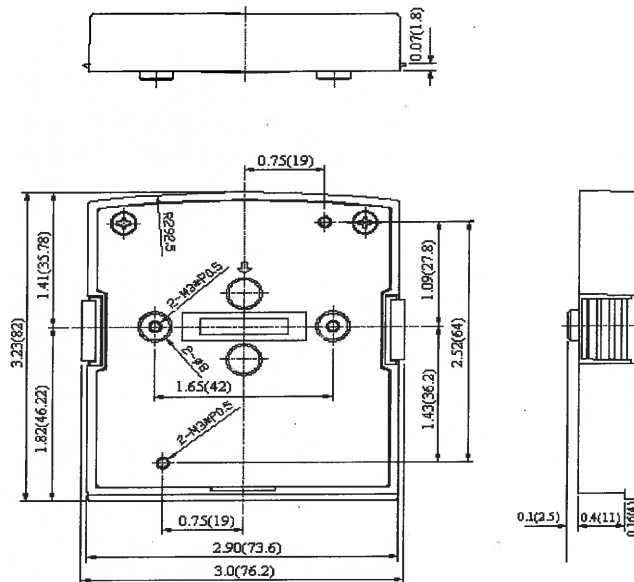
LCD Keypad (N3-LCD) Mounting Dimensions
